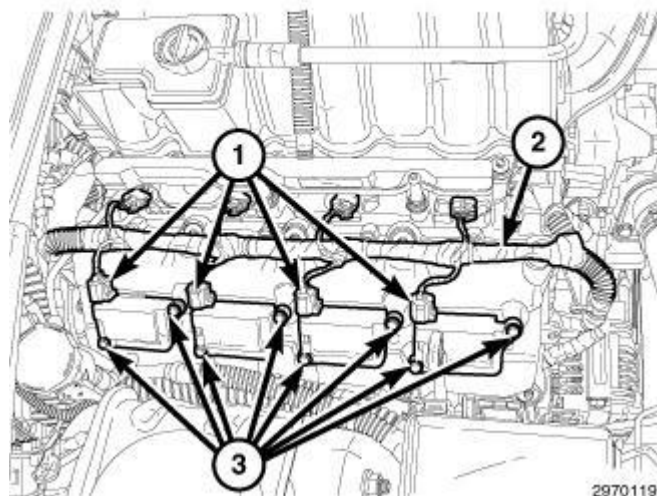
Ignition Coil Electrical Connectors, Harness & Bolts
